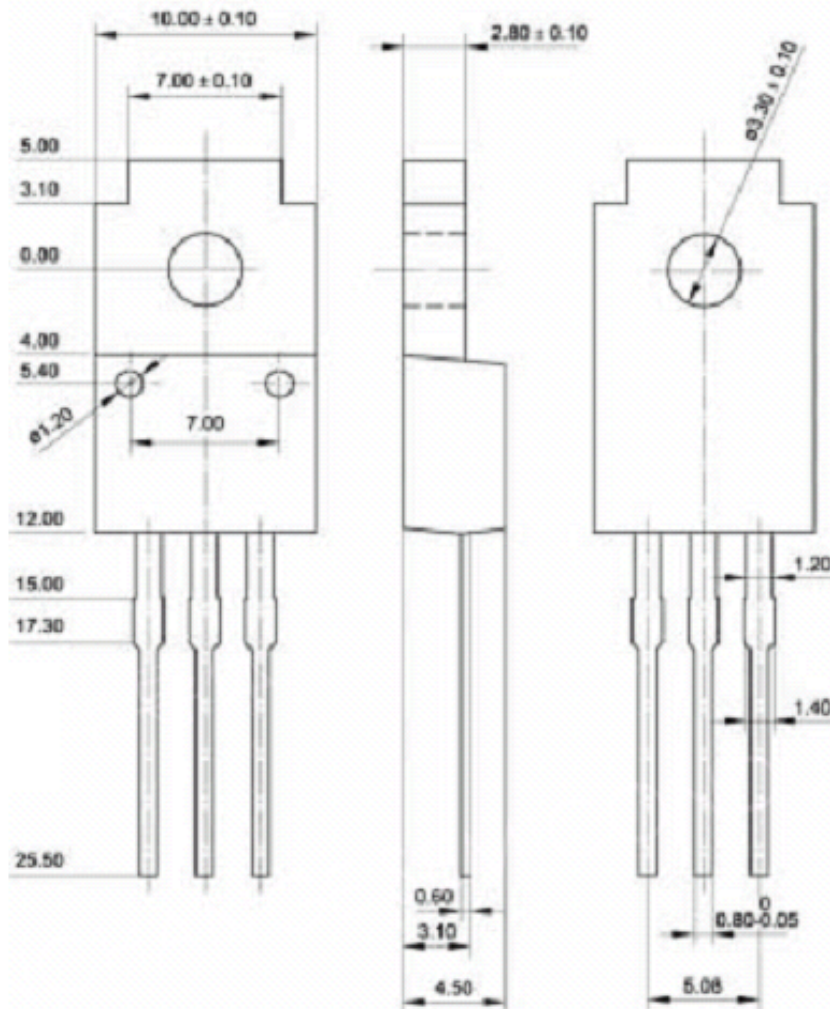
Outline dimensions (unindicated tolerance: ± 0.15 mm)
